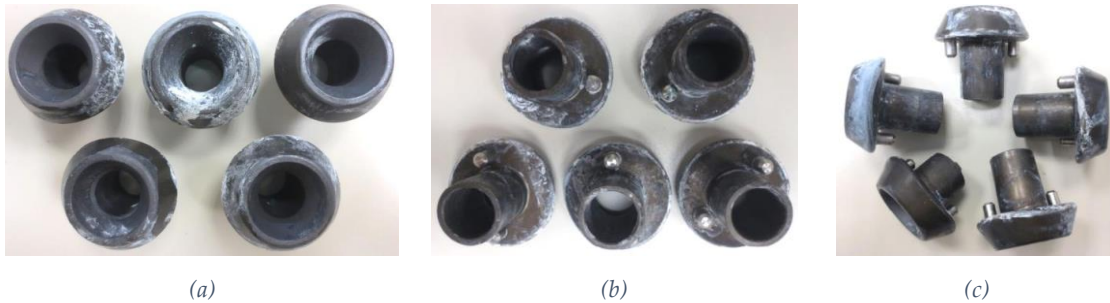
inserts removed from the wheel: (a) top view, (b) back view, (c) side view
